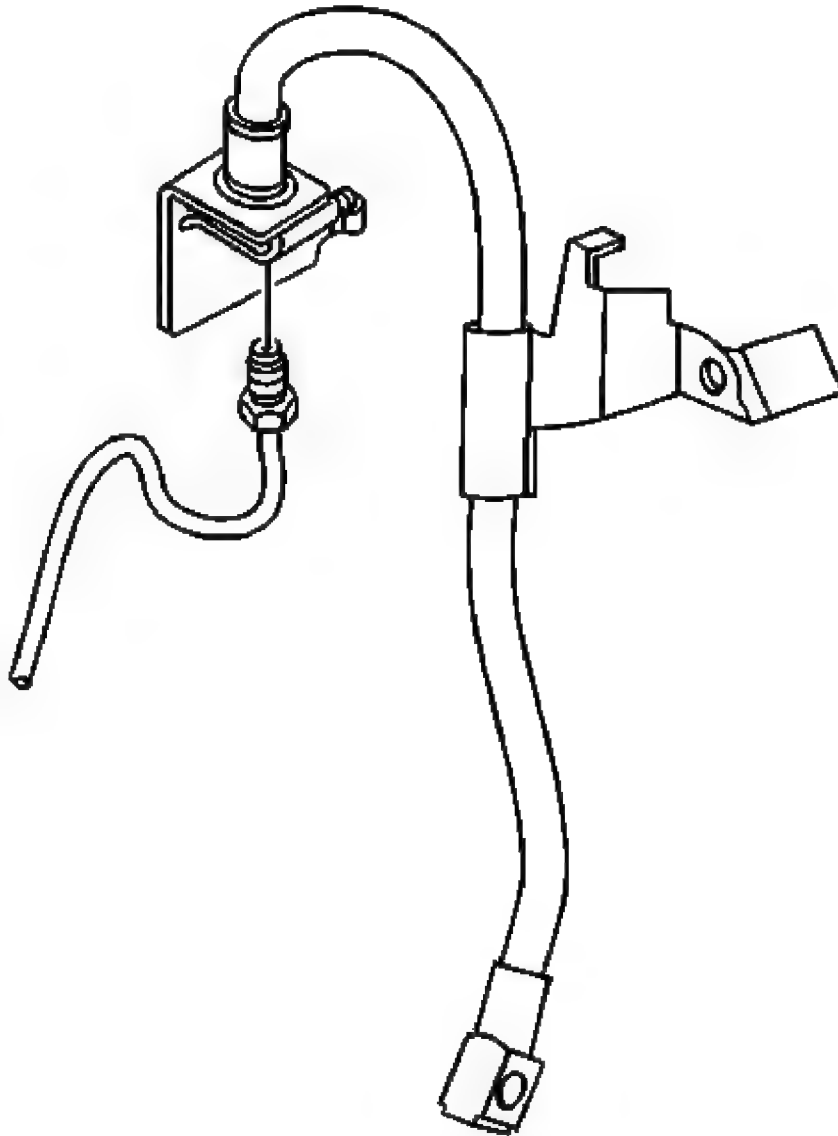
Removing/Installing Brake Pipe Fitting To/From Brake Hose
